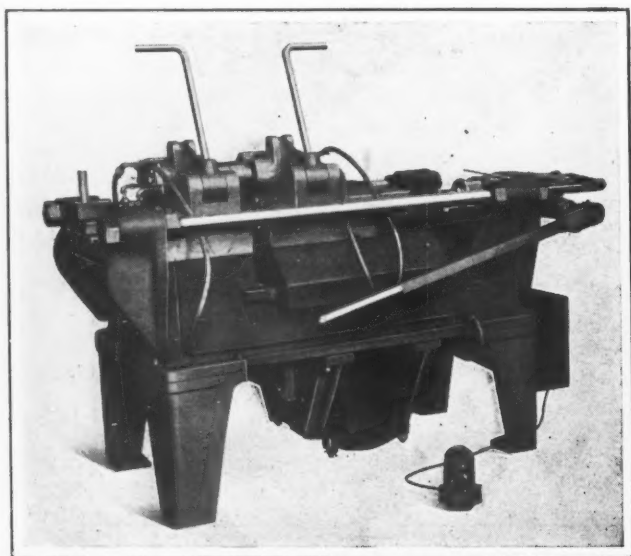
Federal Butt Welder for Tubes and Pipes
